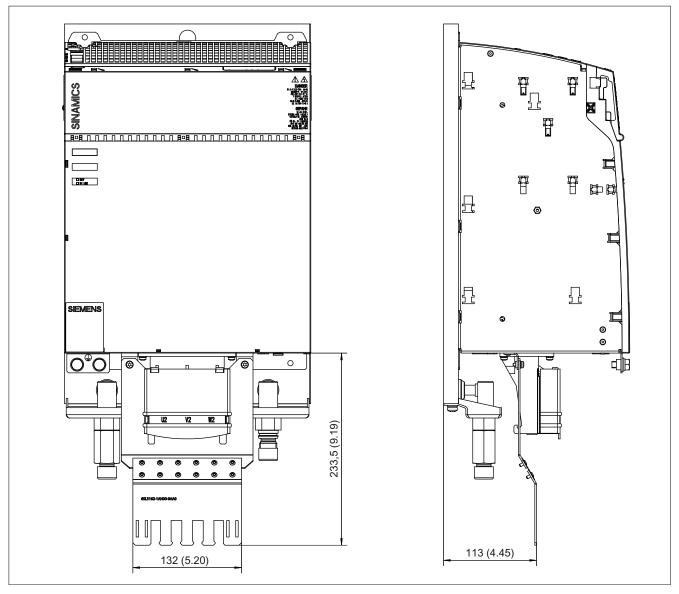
Dimension drawing of shield connecting plate on a 300 mm Liquid Cooled component, all dimensions in mm and (inches)
